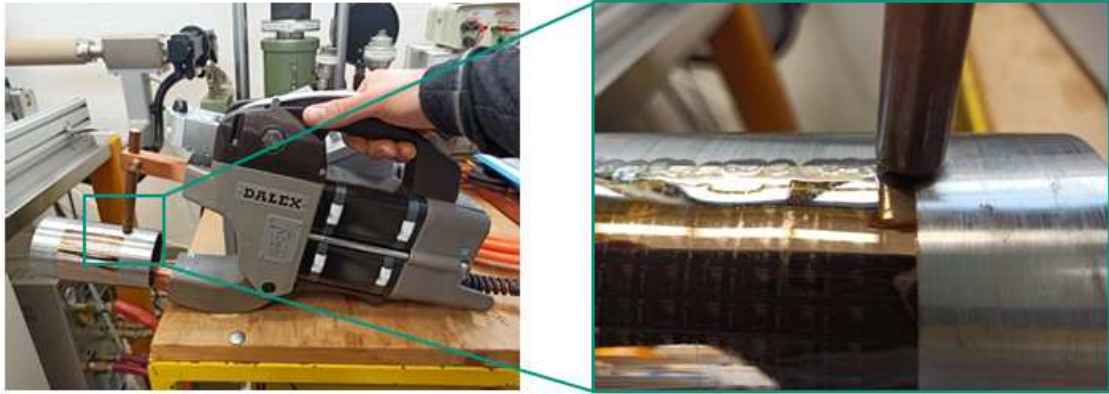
The spot welding gun used for attaching nickel shims to hollow steel cylinders. A series of weld spots is placed on one end of the shim; it is then wrapped around the cylinder and the other edge is welded on. The inevitable seam is about 5-10 mm wide, which is fine for lab applications and might also be for various industrial uses.
